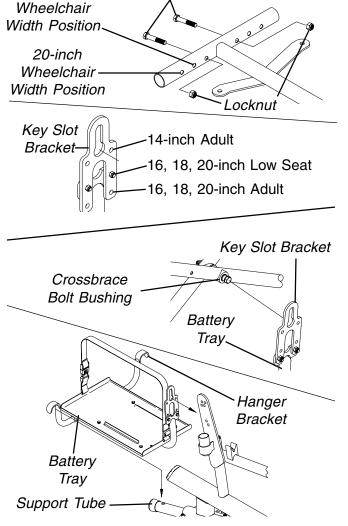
INSTALLING/REMOVING BATTERY TRAY
